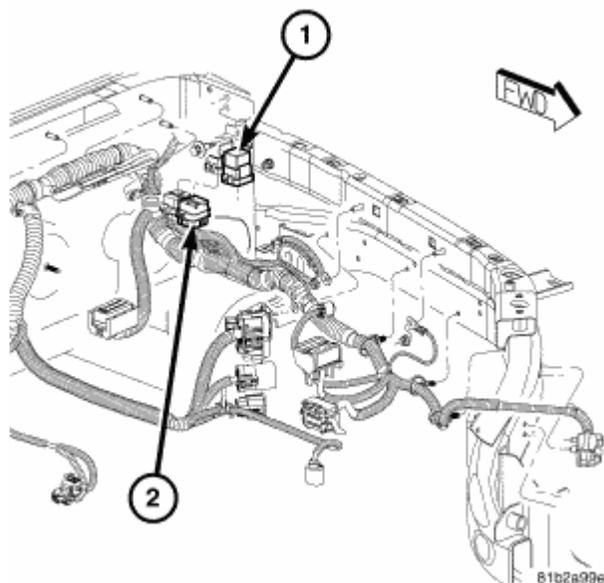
Identifying Fuel Heater Relay & Electrical Connector
